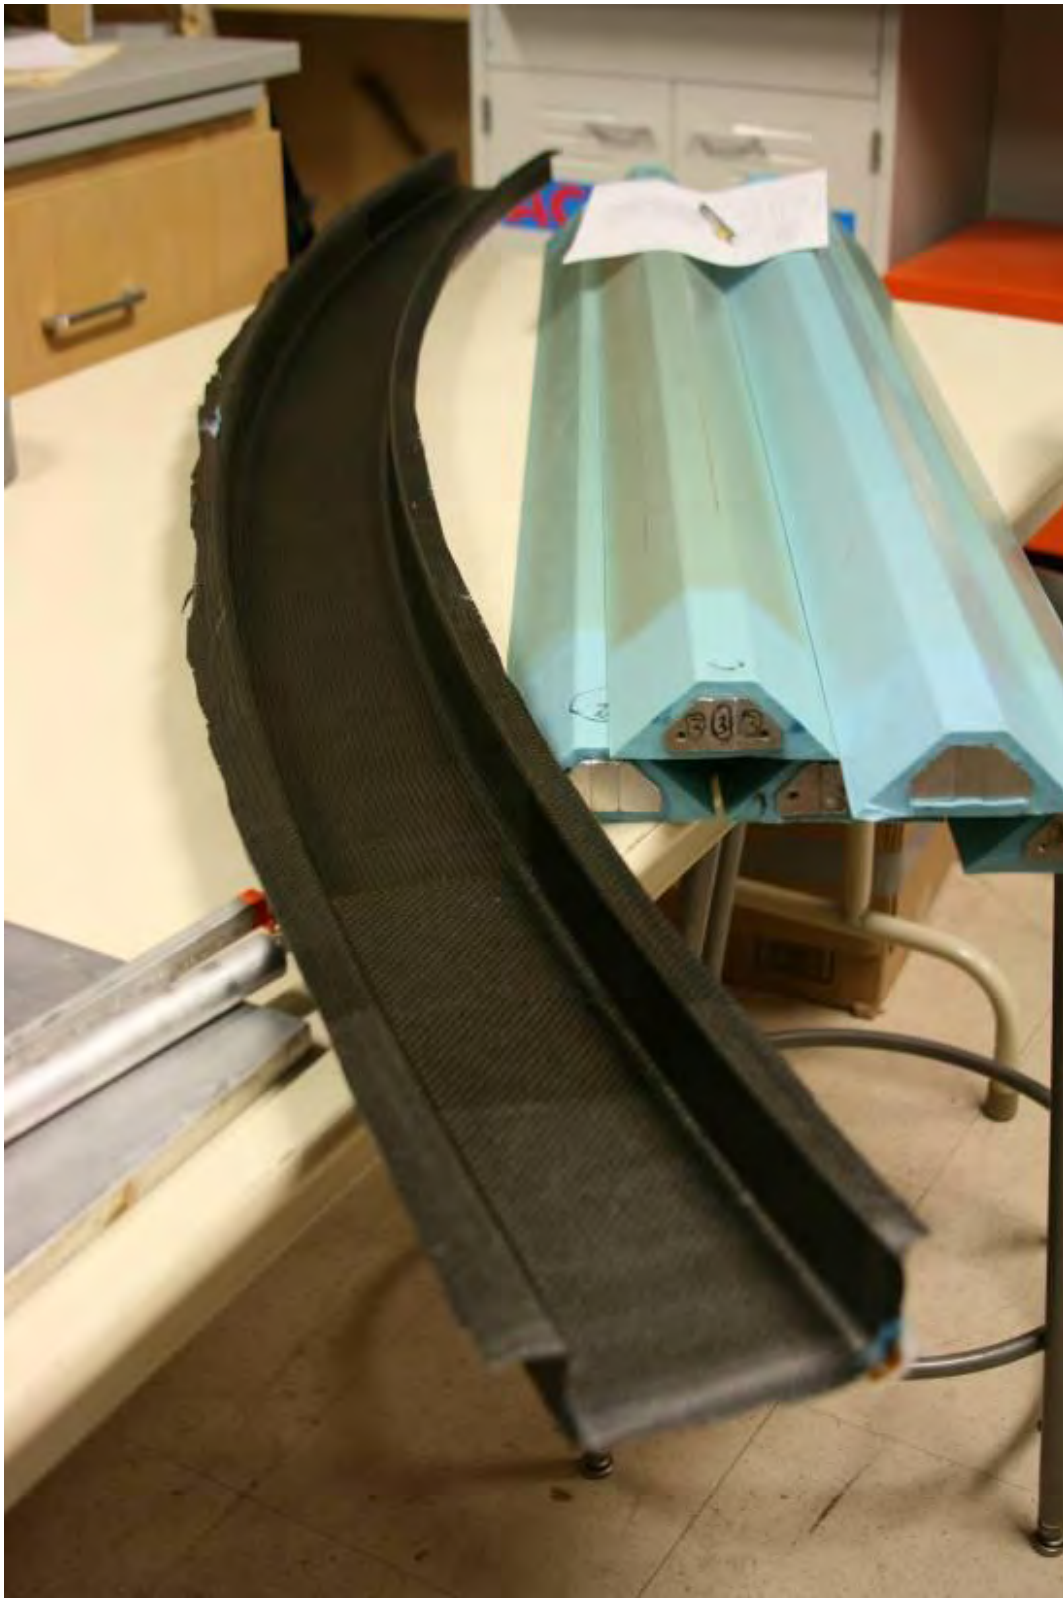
Untrimmed C-Channel Frame; Stringer Internal Silicone Molds
